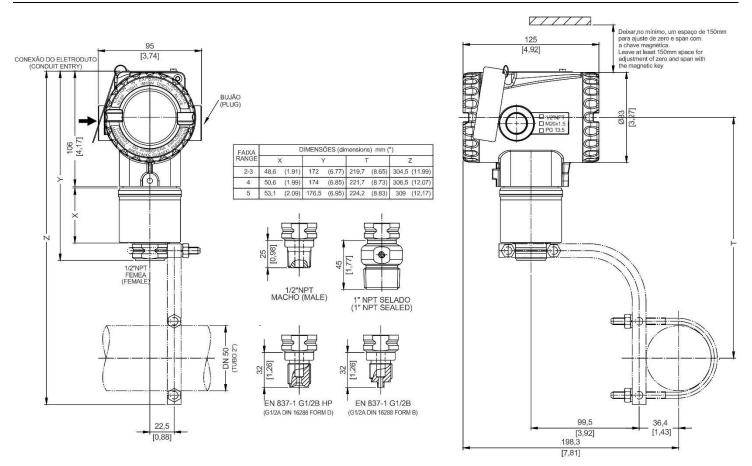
(f) – Dimensional Drawing and Mounting Position for the LD400 HART G - Gage IN LINE
